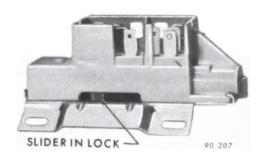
Ignition Switch Slider in 'Lock' Position
